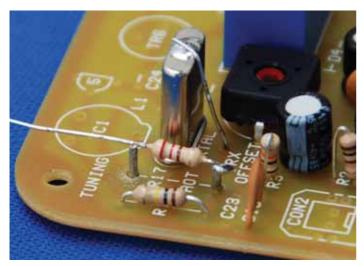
Clear screen printing on the PCB makes assembly easier. I left a long lead on the adjust on test resistor – see text.
